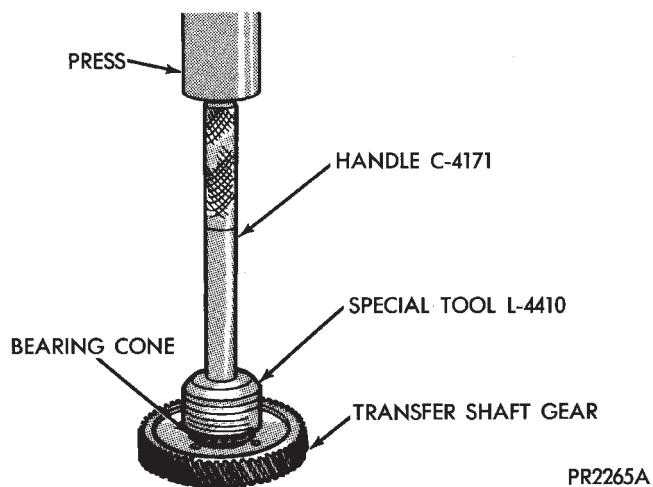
Install Transfer Shaft Gear Bearing Cone
